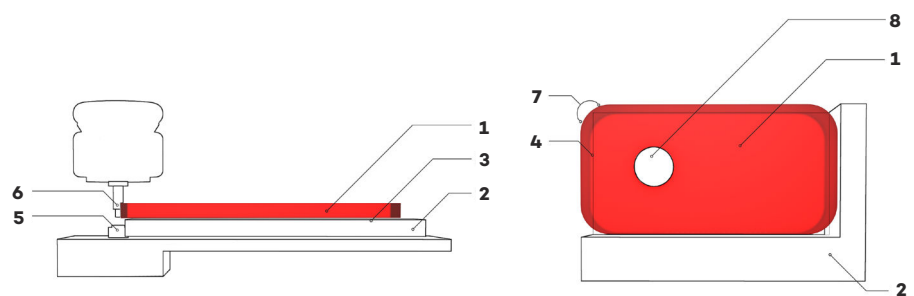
Principle of overhead template routing (rounding of corners: 1 = workpiece, 2 = jig, 3 = stop, 4 = template, 5 = pilot pin, 6 = cutter, 7 = cutter working range, 8 = feed)
